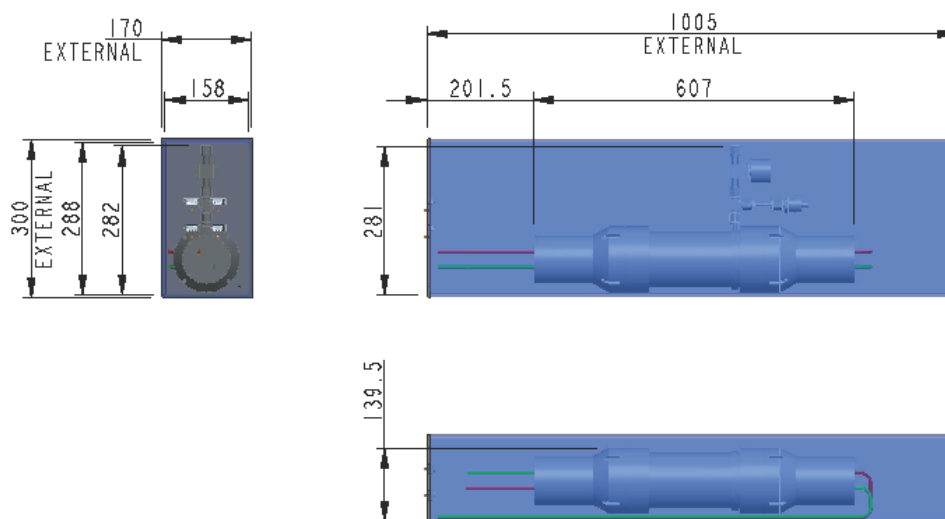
The dimensions of the gamma detector container. All dimensions are shown in mm.
